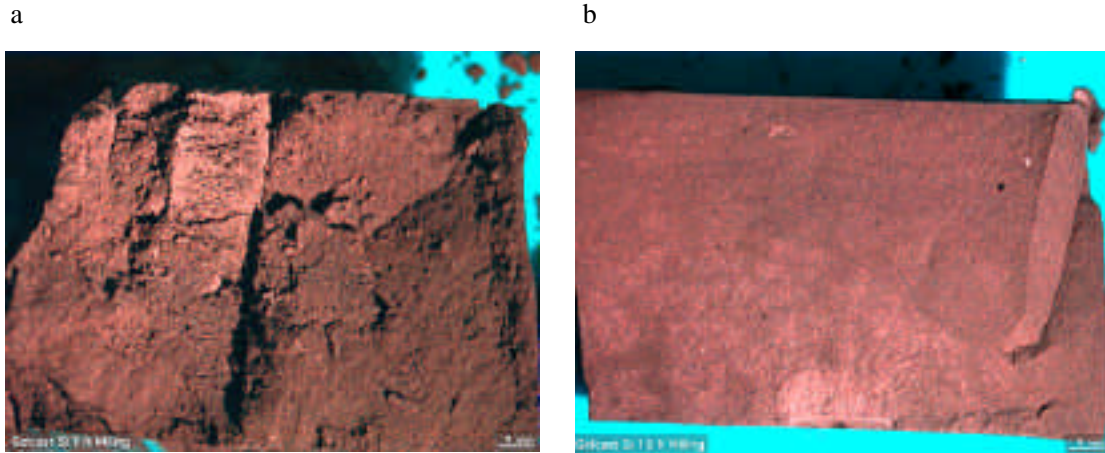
Photographs of fracture surfaces of green, B_4C gelcast parts which were fabricated from slurries milled for a) 1 h or b) 24 h.
